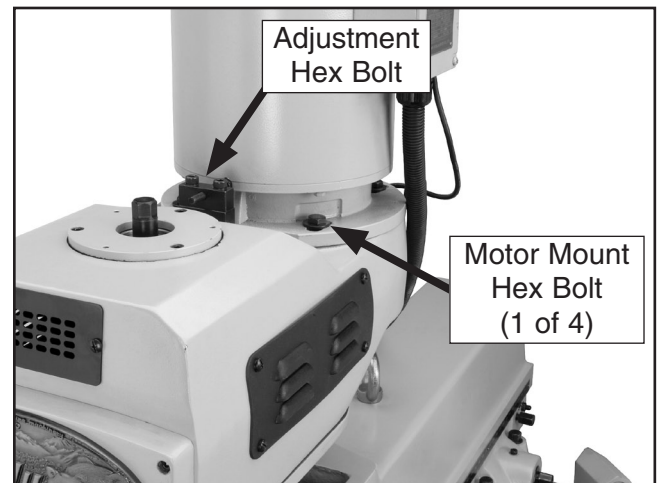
Motor mount and drive belt tension adjustment hex bolts.
